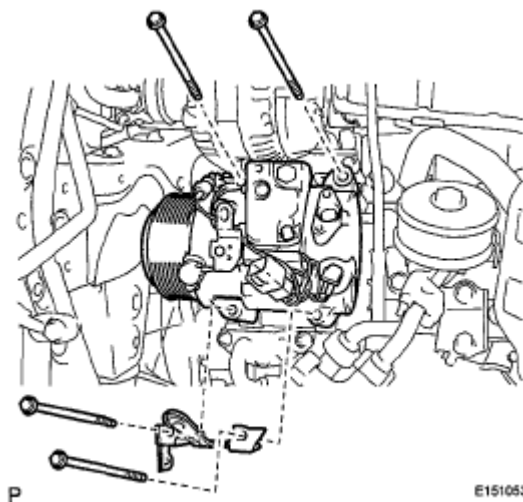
Identifying Compressor, Magnetic Clutch And Bolt
